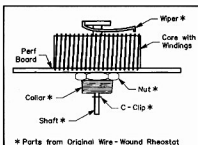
Modified Rheostat Assembly. Wiper and brush make contact with core winding
